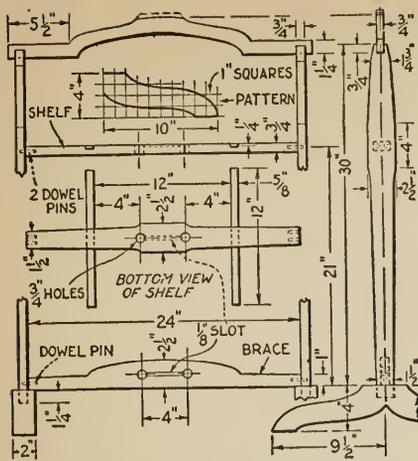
Side and end views of the stand, bottom view of shelf, and pattern for laying out the curves.
